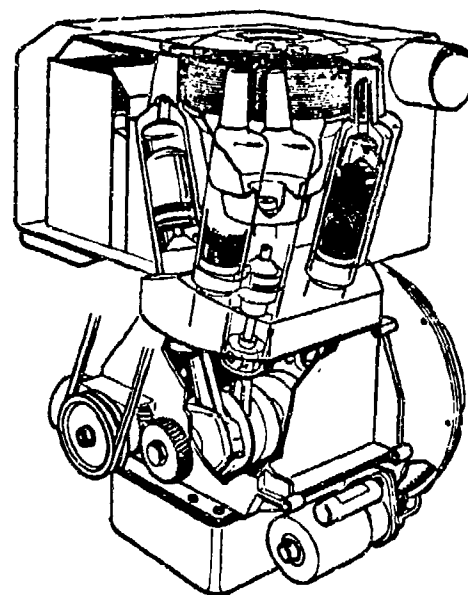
Typical Configuration of a Vee-type Double-acting Stirling Engine (Ref. 30)
